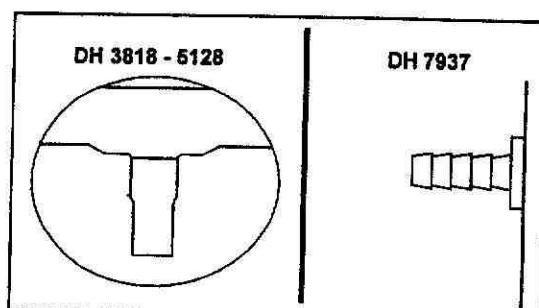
shows the drain outlet of DH 3818, 5128, and DH 7937
